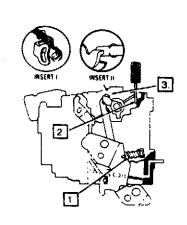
CHOKE ROD (FAST IDLE CAM) ADJUSTMENT
